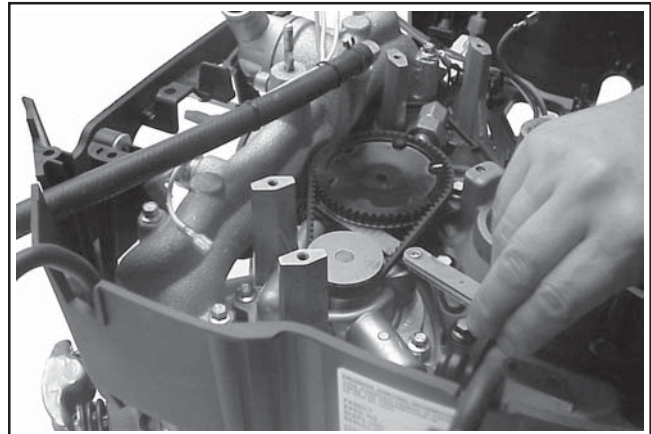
Checking Clearance of Pulley with Feeler Gauge.
